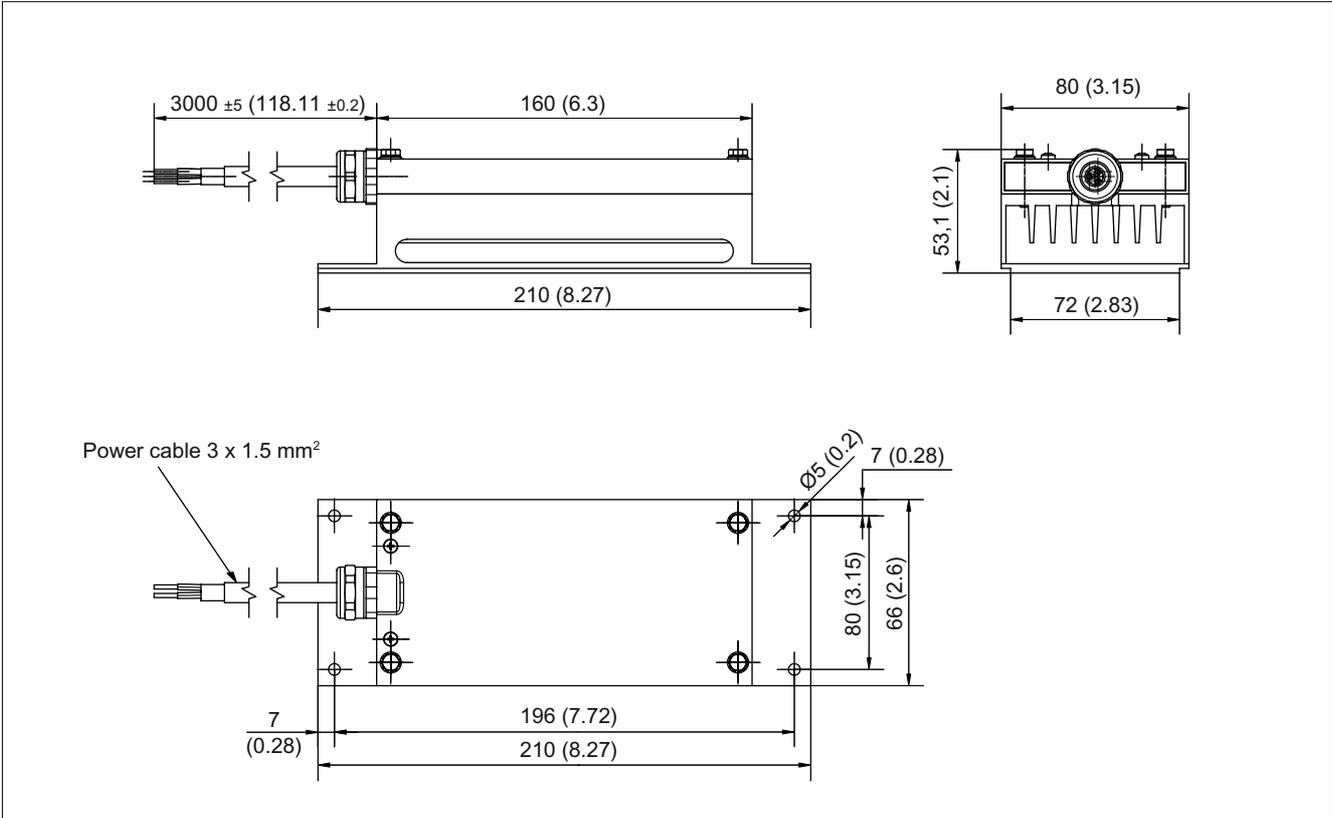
300 W damping resistor for HFD line reactors, all dimensions in mm and (inches)
